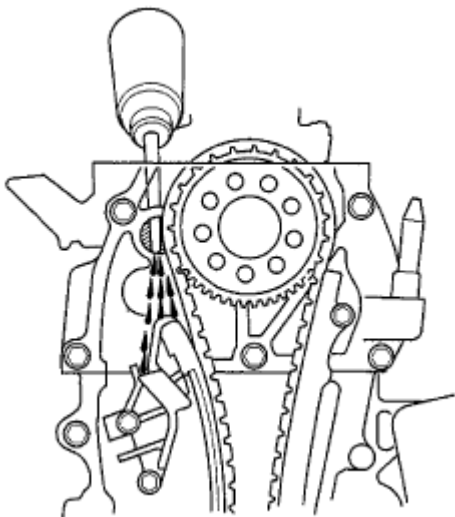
Applying Engine Oil To Slider Surface Of Cam Chain Tensioner Slider Through Oil Return Hole In Cylinder Head
